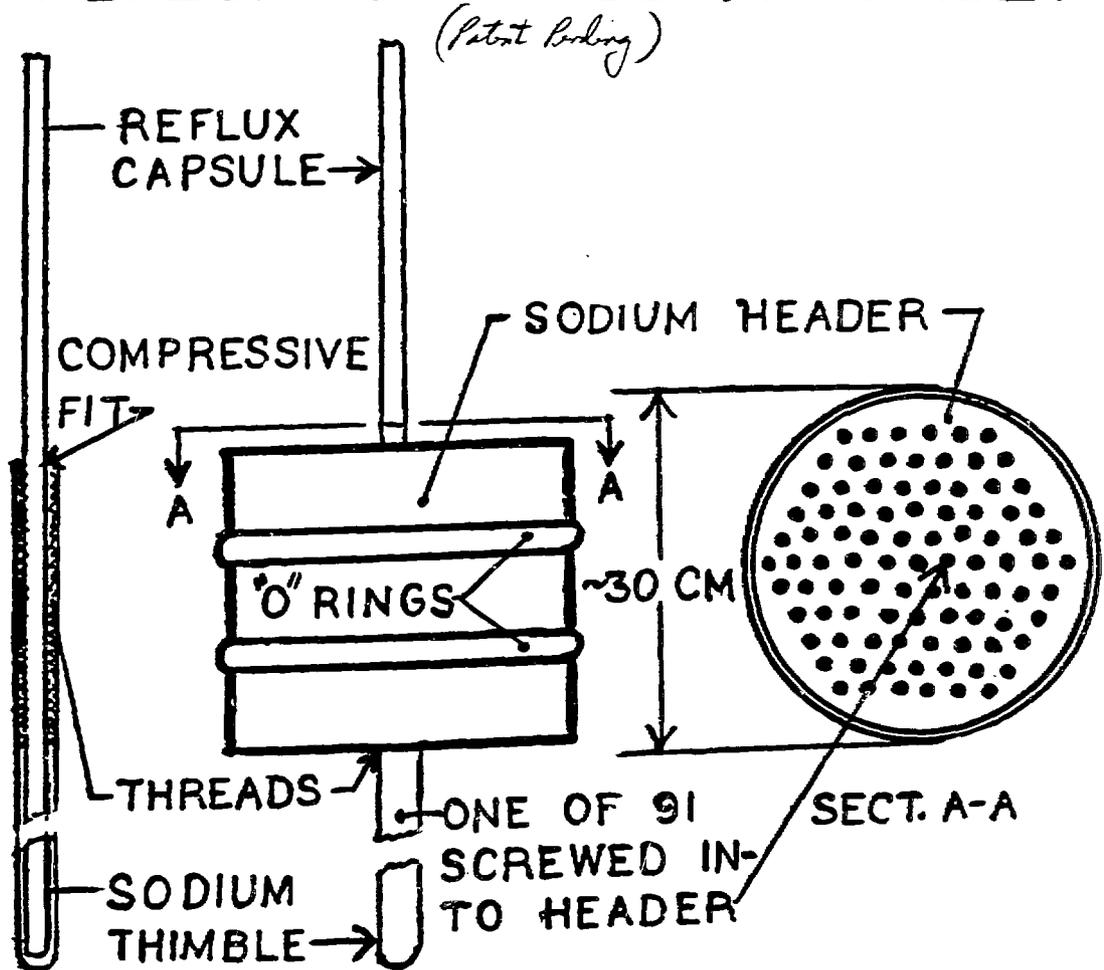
Sodium Portion of Reflux Capsule Assembly
